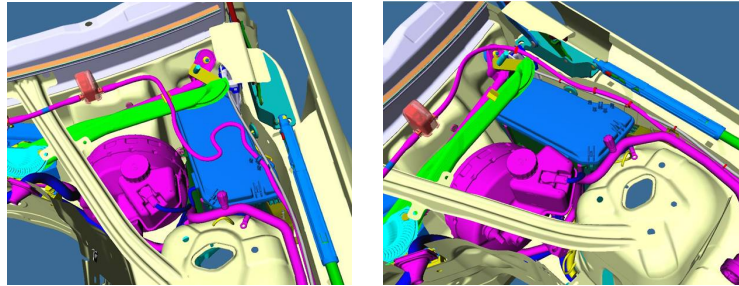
The blue control unit should be disassembled. The bothering cable has to be pushed apart before.
